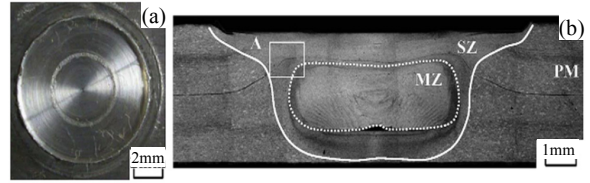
Macroscopic appearance of FSSW joint with probe hole: (a) top view of weld zone and (b) cross section of weld zone
